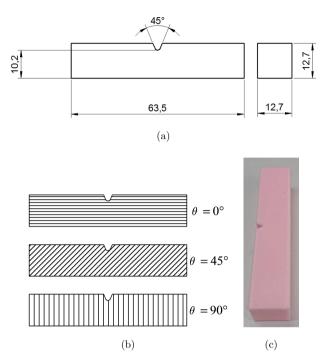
The specimen used in the Izod impact test: (a) the dimensions; (b) the layer orientation; (c) the photo of the specimen.
